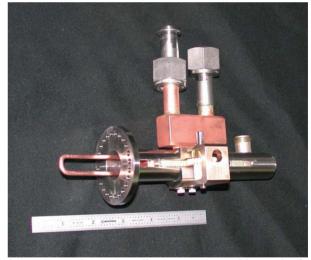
Mark IV Coupling Loop Assembly ready for installation into the cavity.
